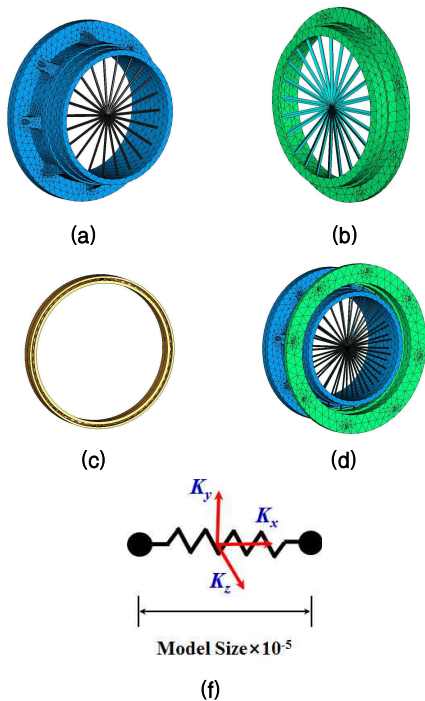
Bearing FE-model: (a) Bearing Shaft, (b) Bearing Housing, (c) Bearing CAD Model, (d) Bearing Shaft and Housing and 3-axis spring element concept (f)
